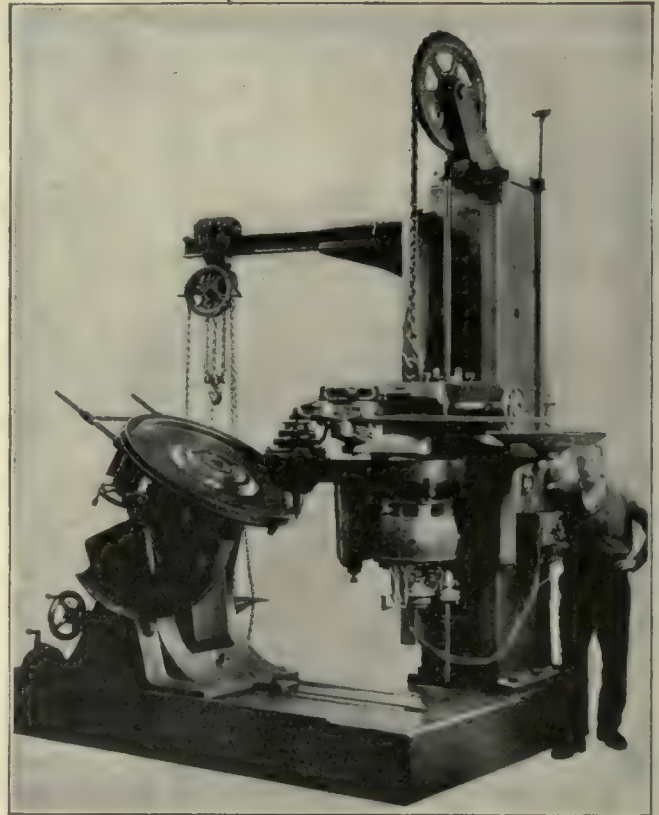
MACHINE FOR ENGRAVING NON-SKID TREAD
